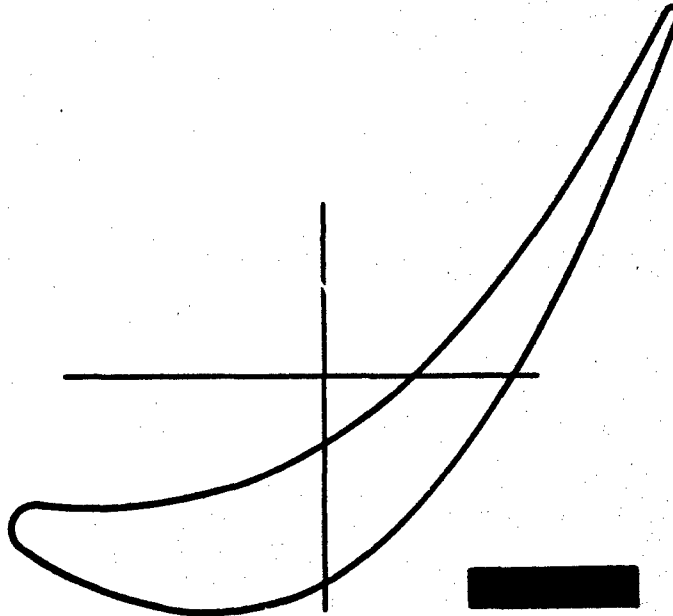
Section D-D, First Vane 1/4 Tip, Planar
